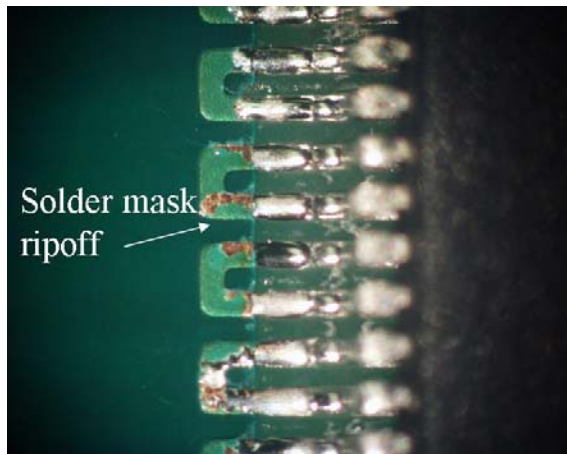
Solder mask rip off defect (QFP (Sn finish) repaired with Sn37Pb solder)
